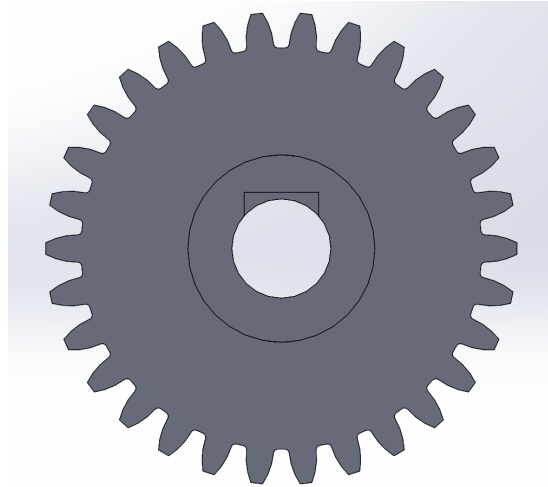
Third Transfer Case Gear Attached to the Front Driveshaft Profile
